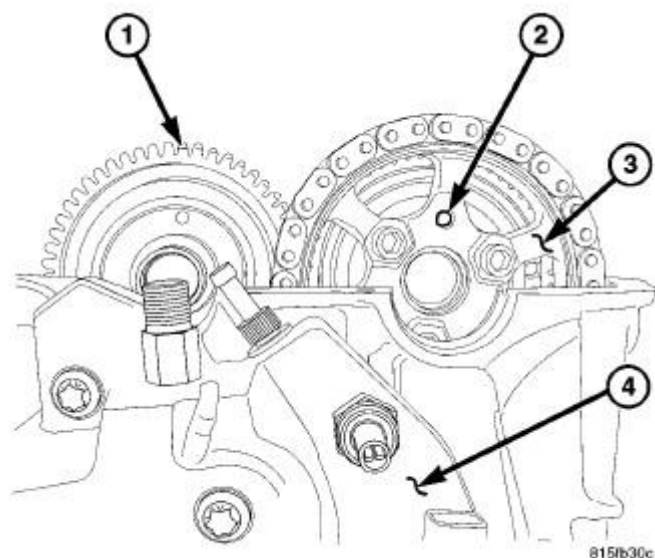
LEFT EXHAUST CAMSHAFT DRIVE GEAR ALIGNMENT DOWEL
